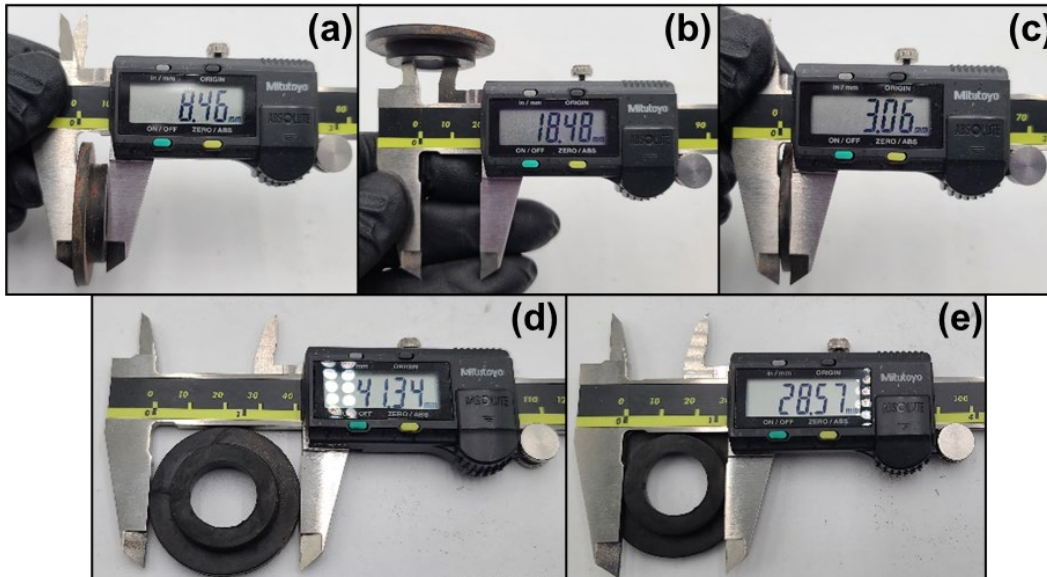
Dimension measurements of the OEM gladhand seal taken off the vehicle. (a) total thickness, (b) inner diameter (ID), (c) outer lip thickness, (d) outer diameter (OD), and (e) inner lip diameter.
